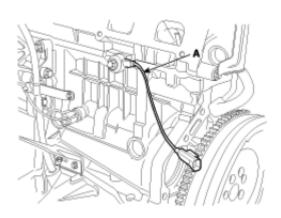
Identifying Knock Sensor Courtesy of HYUNDAI MOTOR CO.
